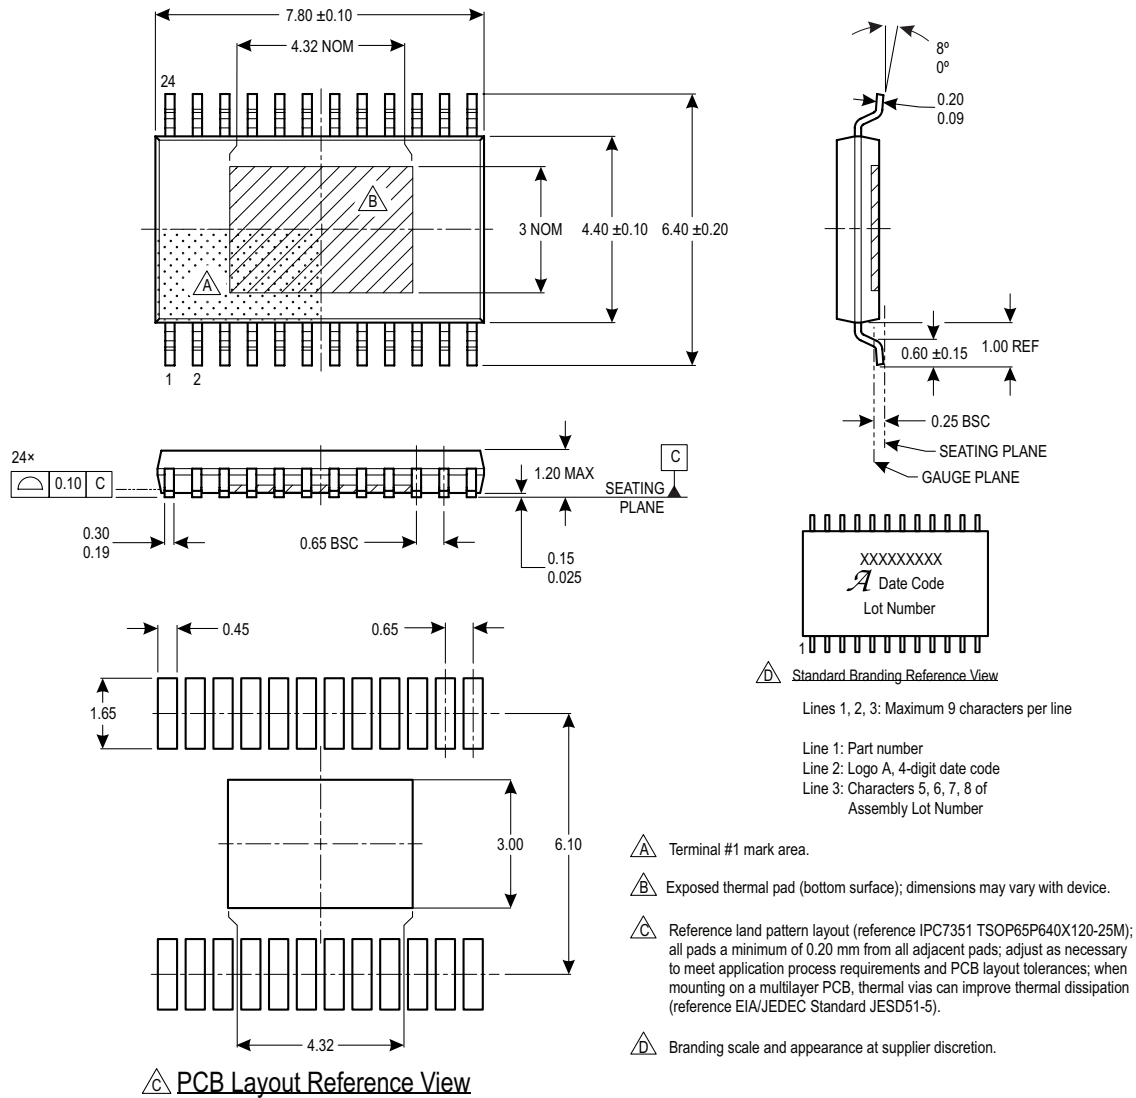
Package LP, 24-Lead TSSOP with Exposed Pad
